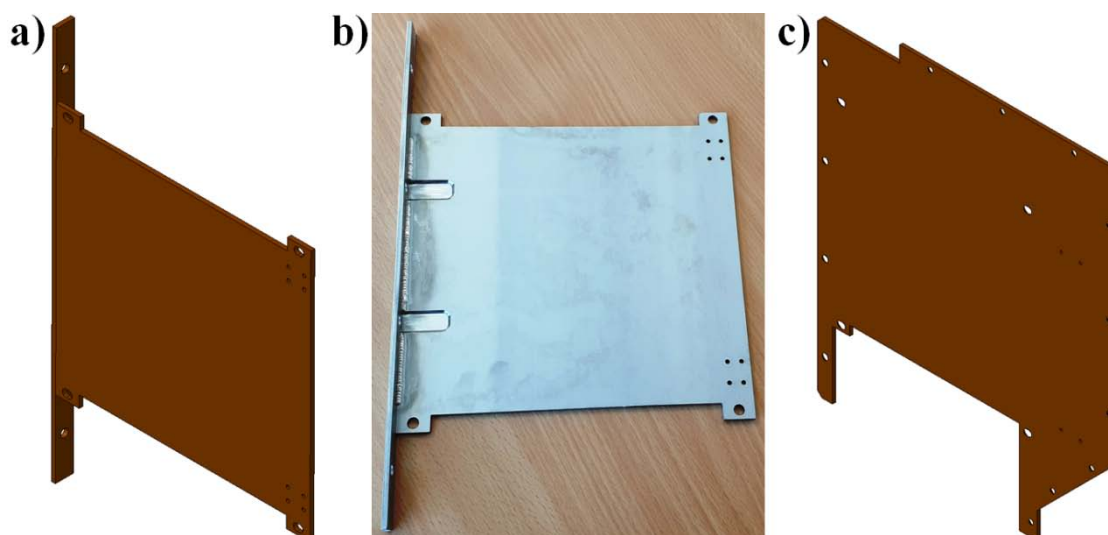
a) Regular wall 3D model; b) Regular wall – manufactured;
